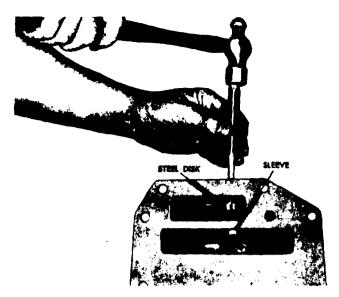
C-33. Removing Oil Pump Bearing Sleeve
